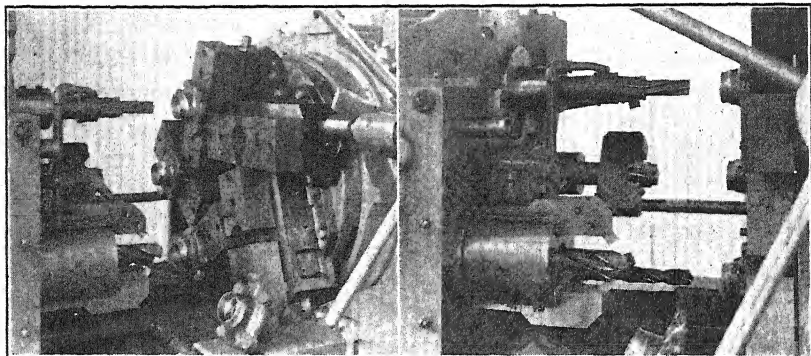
A Close-Up of the Goss and DeLeeuw 8 1/2-In. by 8-In. 5-Chuck Semiautomatic Turning Machine.
